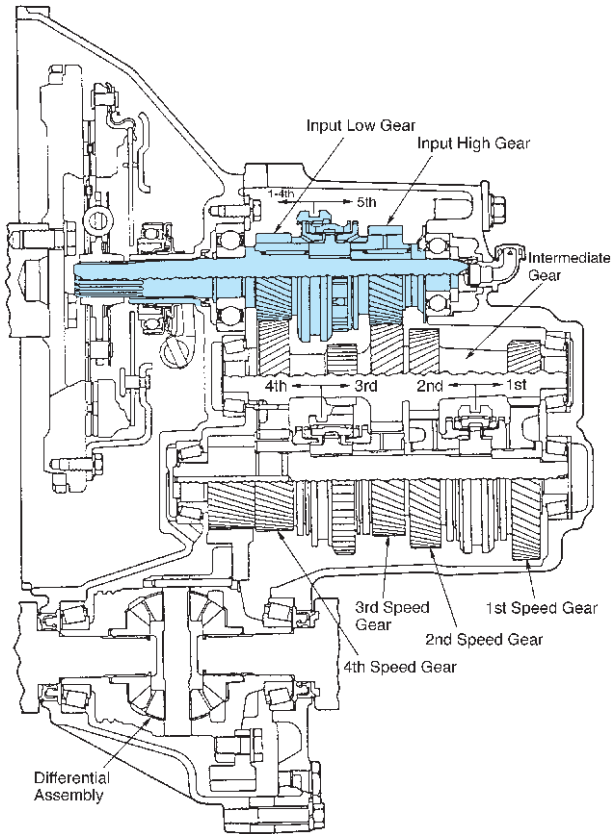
This transaxle uses four major shafts; note how the uppermost synchronizer assembly can drive the intermediate gear set through either third or fourth gear. (Courtesy of Hyundai Motor America)
